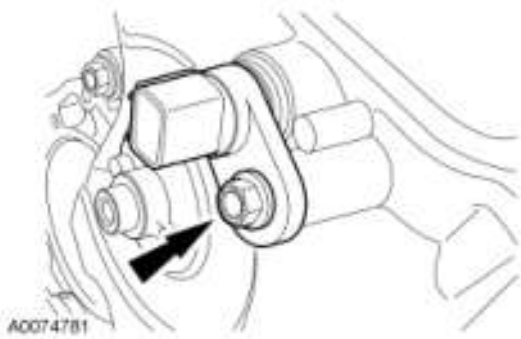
Locating Oil Level Indicator Tube Bolt
